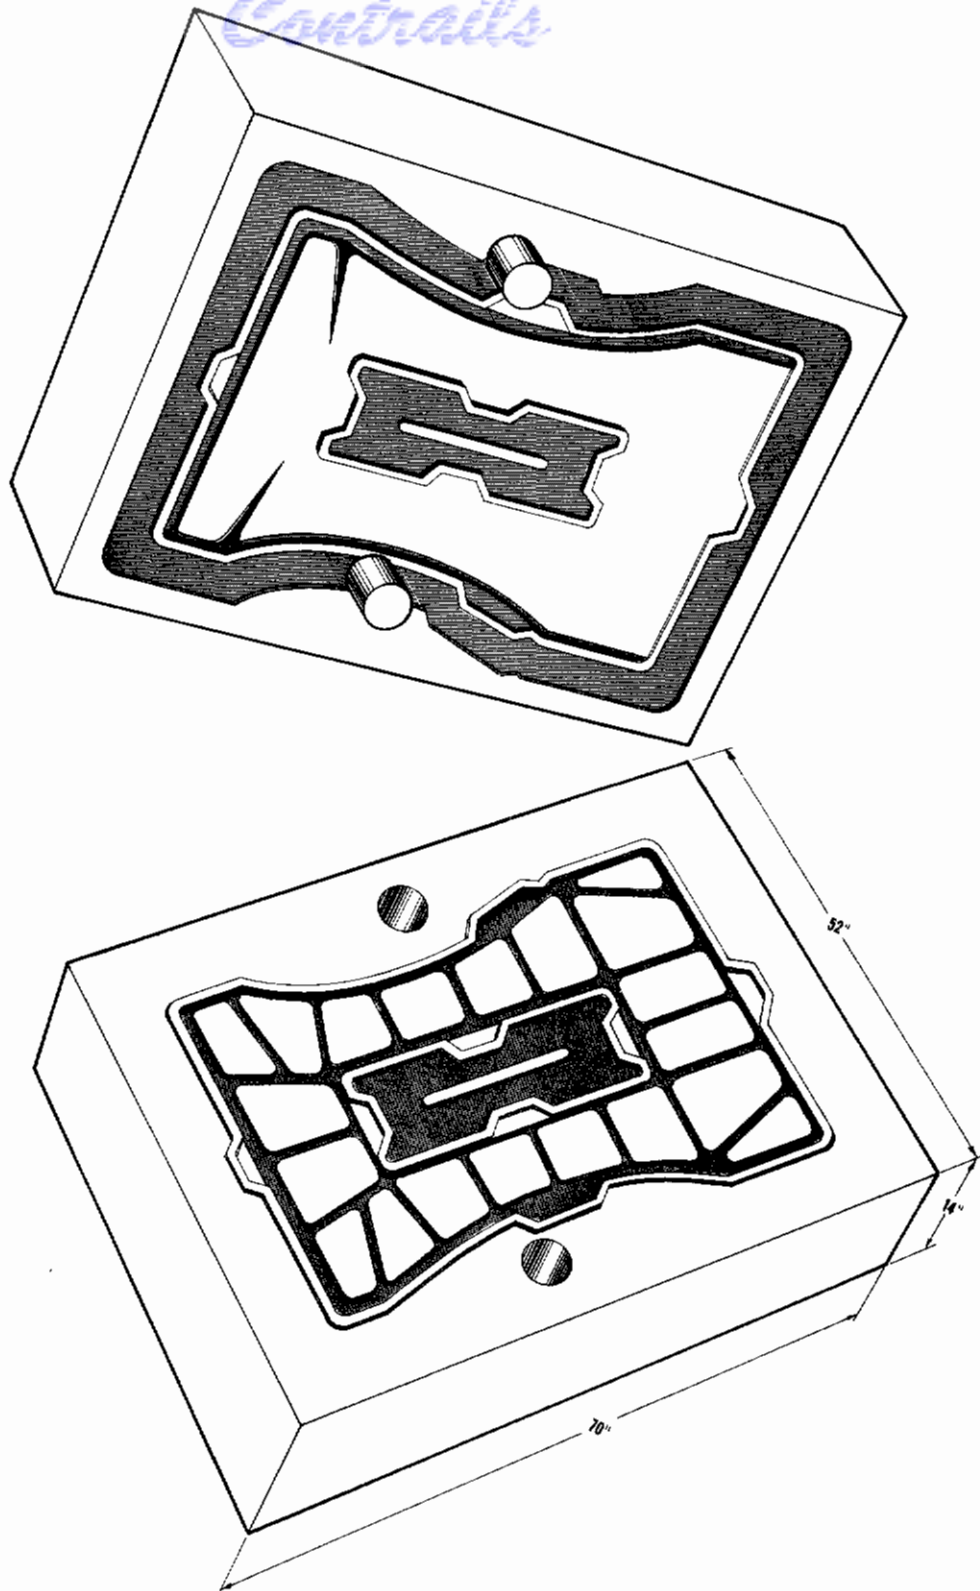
Schematic Illustration of Impression Dies for Finish Bulkhead Forging Operation with 50,000 Ton Hydraulic Press.
